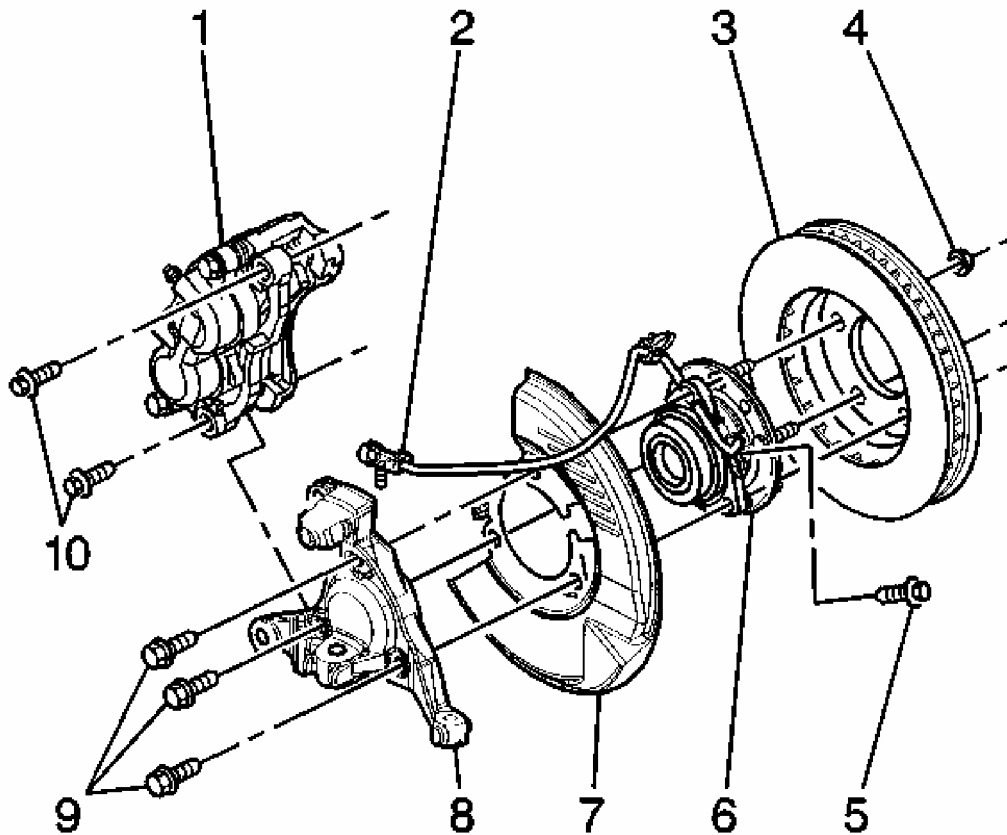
Locating Wheel Speed Sensor (RWD Utility)
